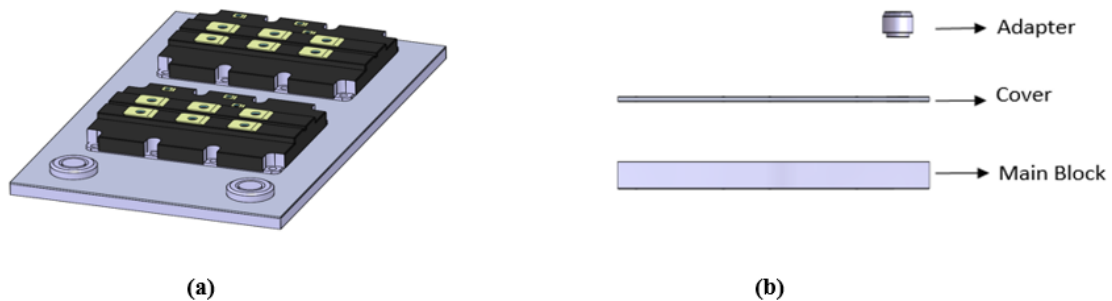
(a) IGBT mounted cold plate; (b) Assembly of subcomponents of the cold plate.
